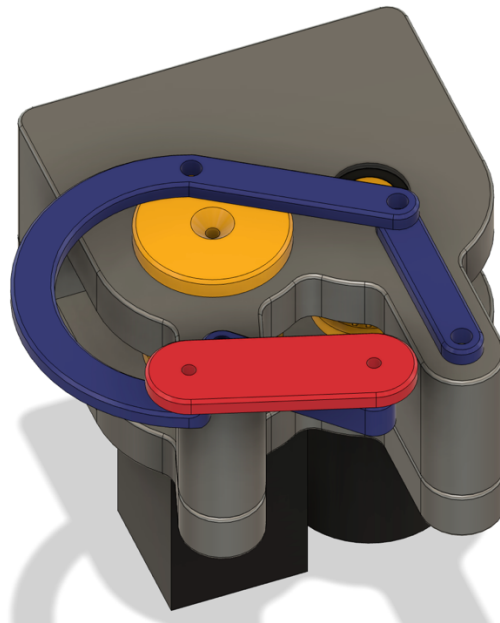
CAD drawing of second model's entire linkage mechanism
